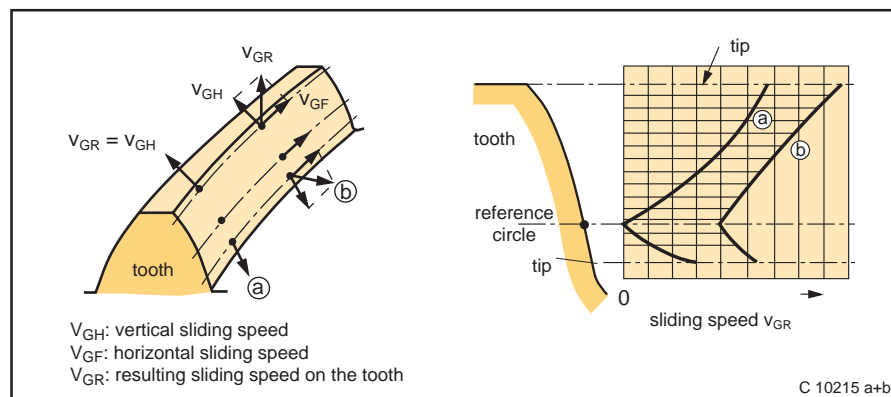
Sliding speeds on tooth flanks of rolling spiral and helical gears
